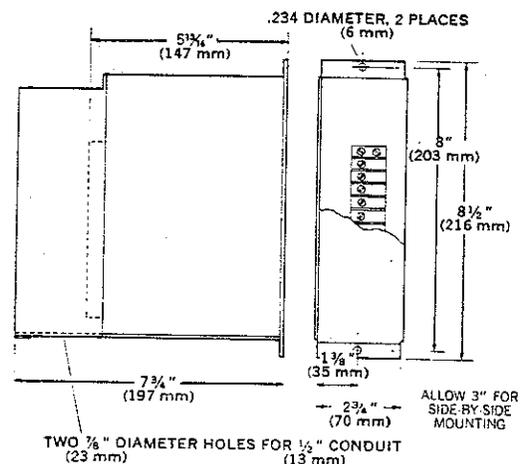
A Mounting Dimensions Single Unit Enclosure
